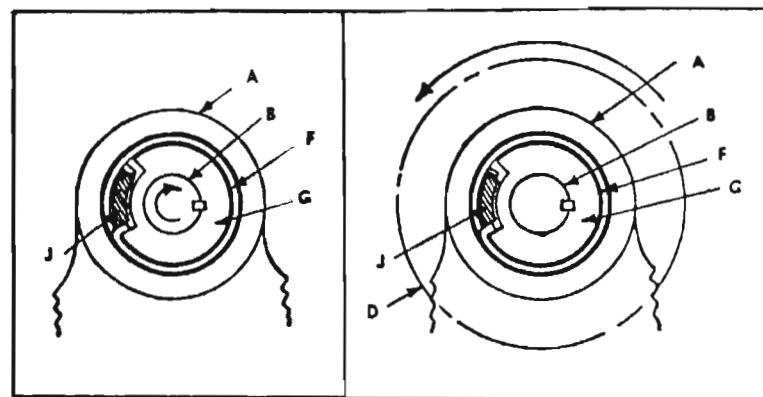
(Left) View of Counterbored End of Bearing *A* Indicating Rotation of the Pinion in the Direction Shown by Arrow, which Transmits Motion to the Rack; (Right) View of Counterbored End of Bearing *A* Illustrating Operation of Locking Action which Prevents Movement of the Rack.
